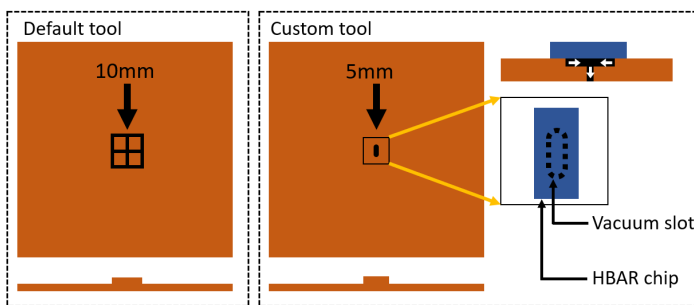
Arm's default vacuum tool isn't suited for the dimensions of the HBAR chip. A new tool is designed to grab the HBAR chip with a 1.5 mm vacuum slot. A magnified view of the slots shows how the HBAR fits the slot and a side cut shows how the vacuum chain is closed once the chip is grabbed.
